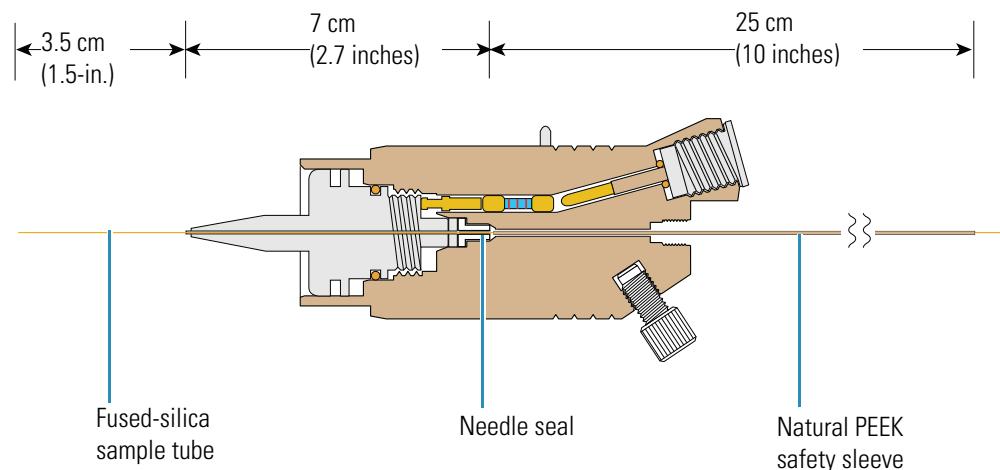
Inserting the fused-silica sample tube through the front of the ESI probe
